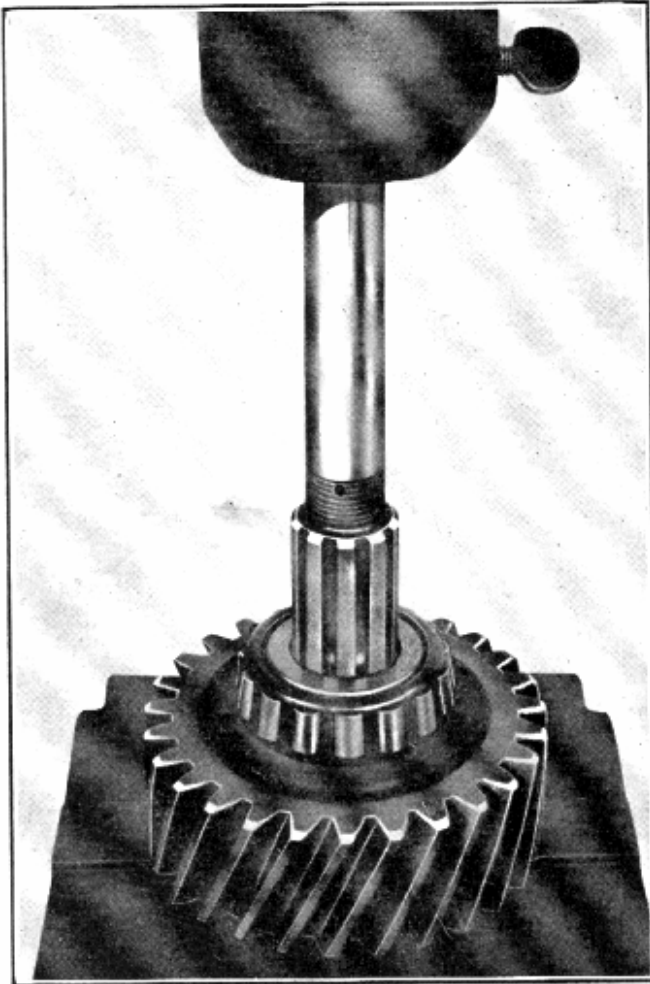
Removing Gear and Bearing from Shaft in Arbor Press
